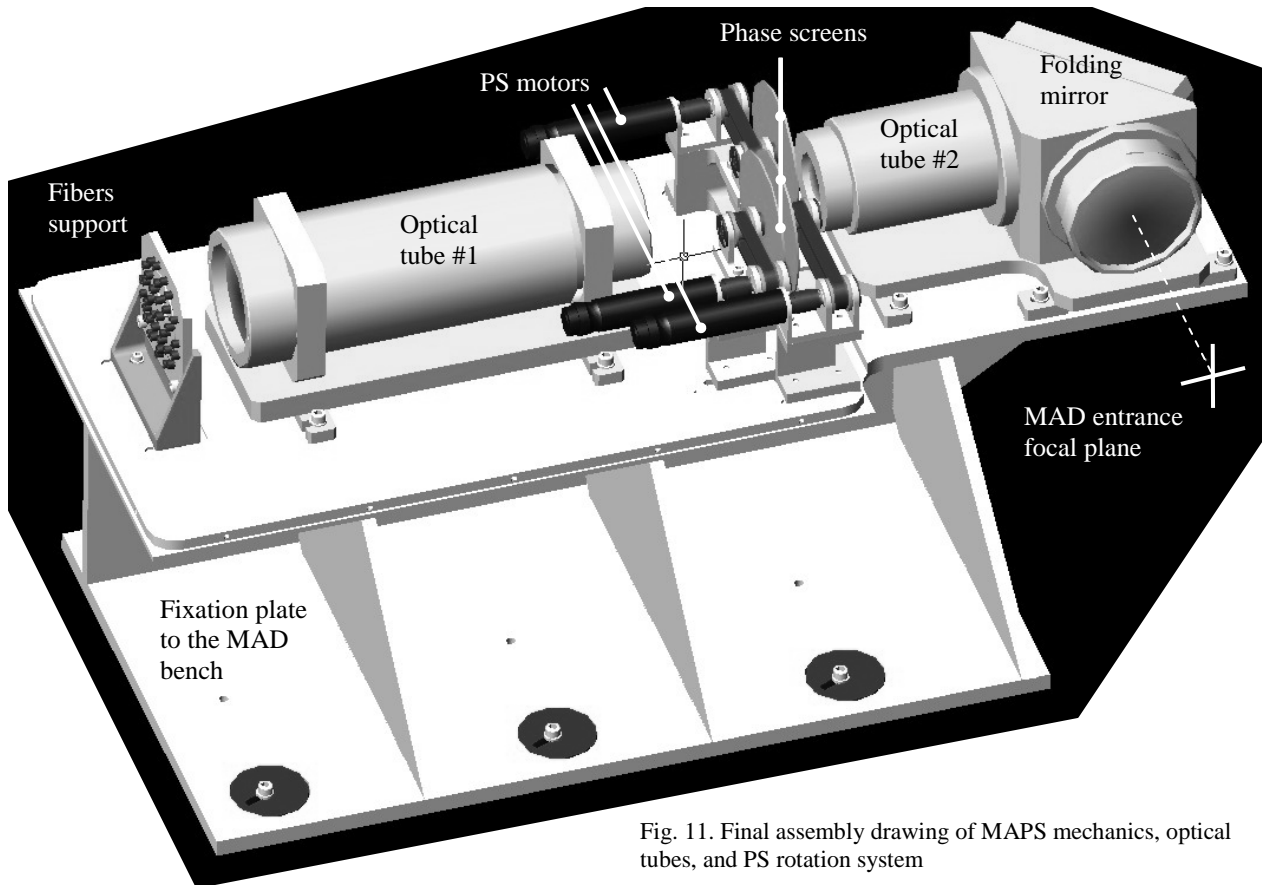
Final assembly drawing of MAPS mechanics, optical tubes, and PS rotation system
